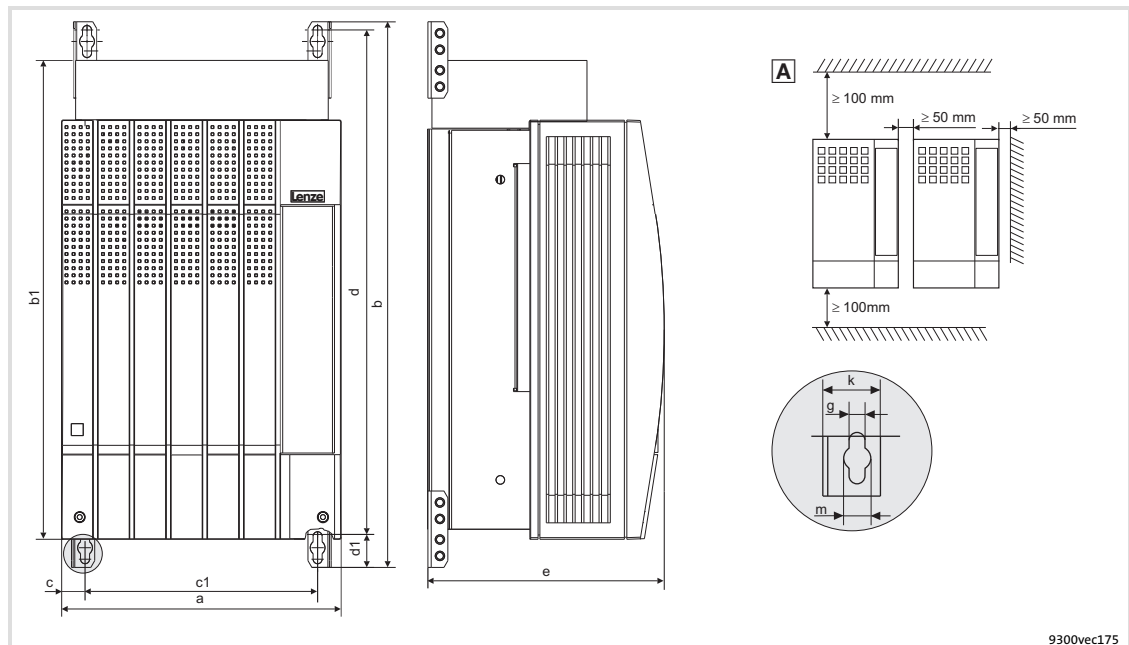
Standard mounting with fixing brackets 55 kW
